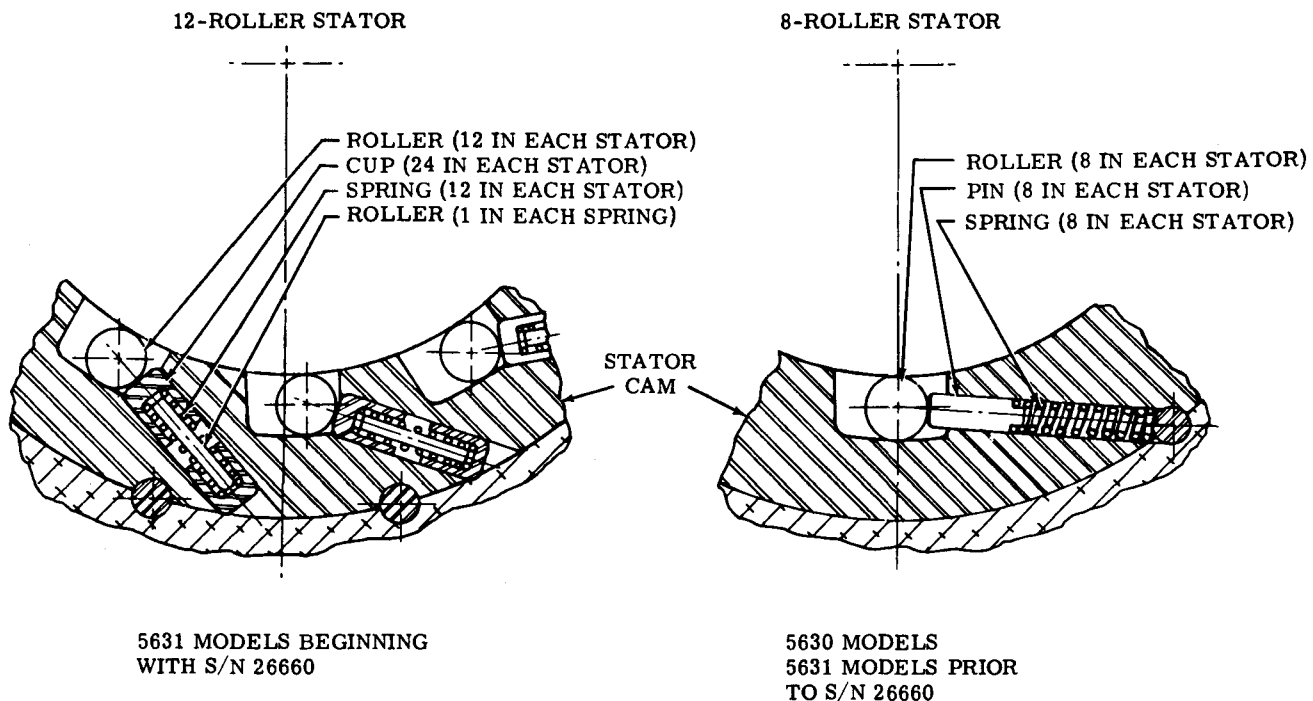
Arrangement of stator free-wheel components—cross-section, front view
